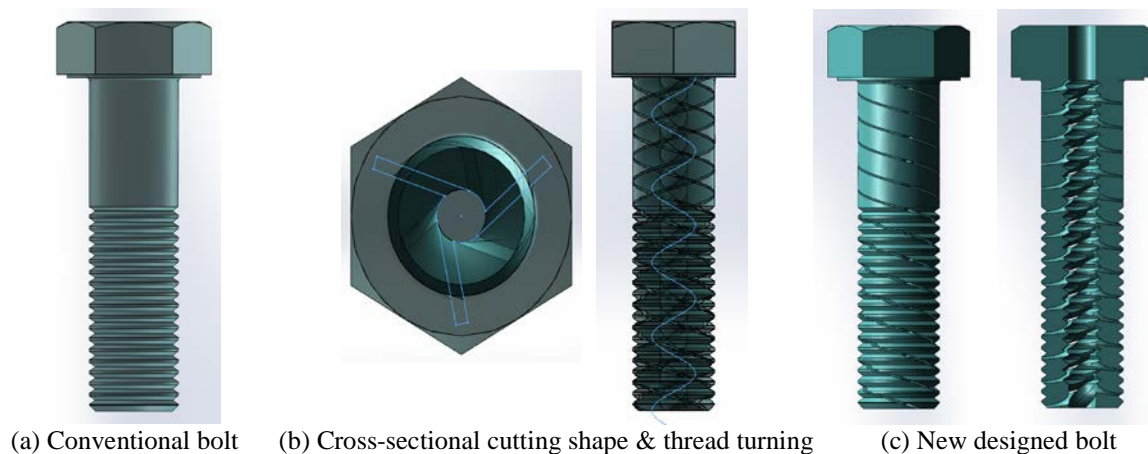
Helical-cutting applied bolt for self-loosening preventable threaded fasteners
